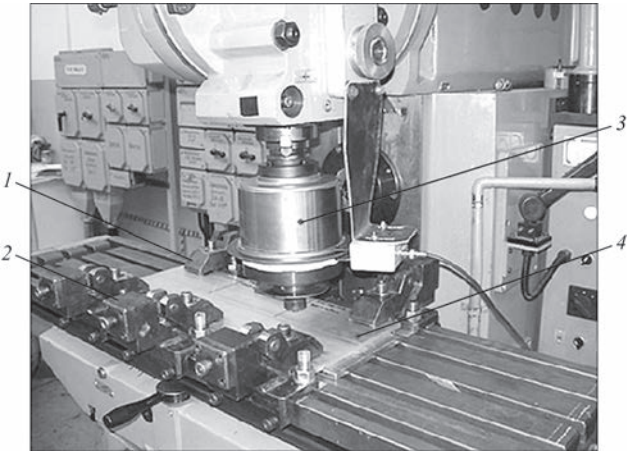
Type of installation for friction stir welding: 1 — tool; 2 — fastener; 3 — unit for tool fixation; 4 — parts to be welded
